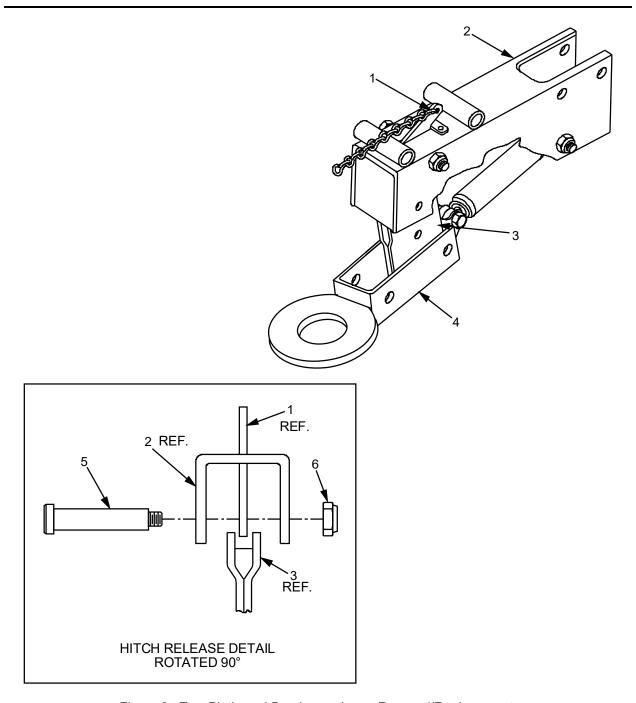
Tow Pintle and Breakaway Lever Removal/Replacement.
